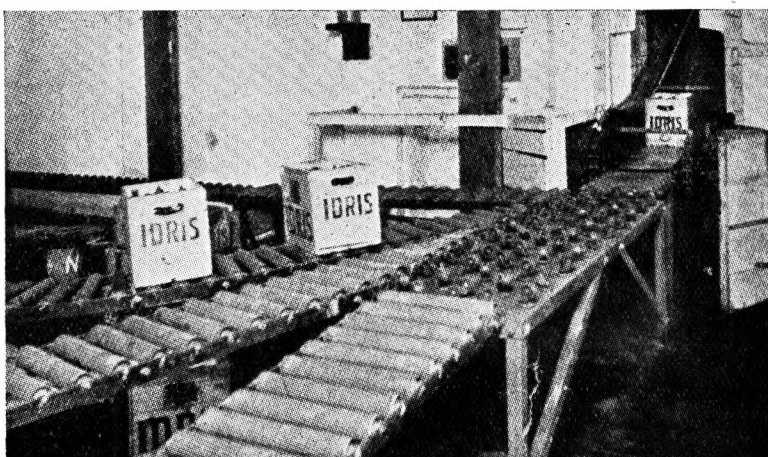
Five-track roller conveyor and distributing table receiving from push bar conveyor for sorting and transport purposes.
